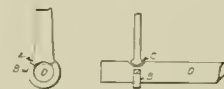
Welding on a Tumbling Shaft Arm
